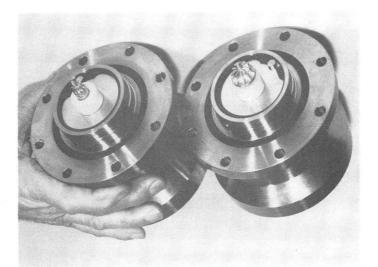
(CBB 770-10437). Cold expander end of two turbines, 12 mm dia. and 20 mm dia., used on 1500-W. LBL photo.
